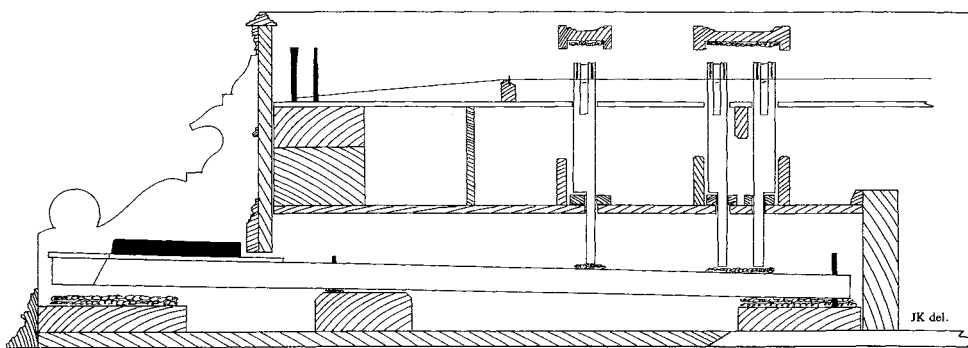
Harpsichord, Hans Müller, Leipzig, 1537 (Museo degli Strumenti Musicali, Rome): Elevation, showing construction of the wrest plank and soundboard (some details of the action are conjectural).
